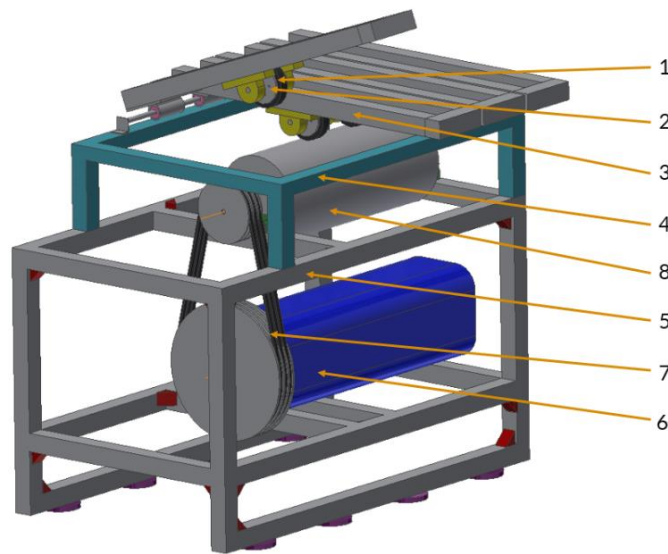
CAD model of the stand with key elements marked: 1 – Cylindrical rubber sample, 2 – Pressure disc, 3 – Lever system, 4 – Support frame, 5 – Structural frame, 6 – Electric motor, 7 – Belt transmission, 8 – Steel drum (counter-sample)
